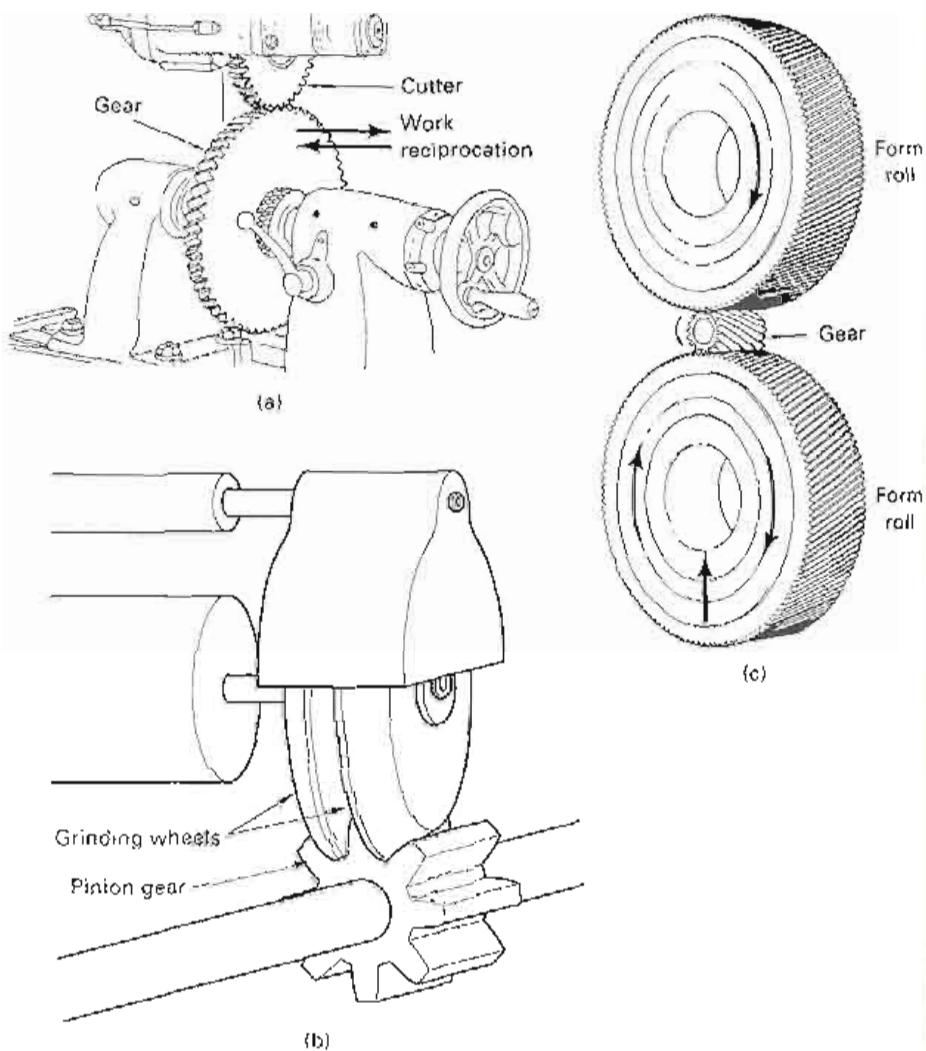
Three methods for gear finishing are (a) shaving using a special cutter—see Figure 29-25, (b) grinding using form grinding wheels, and (c) using form rolls, that is, roll forming/finishing.
